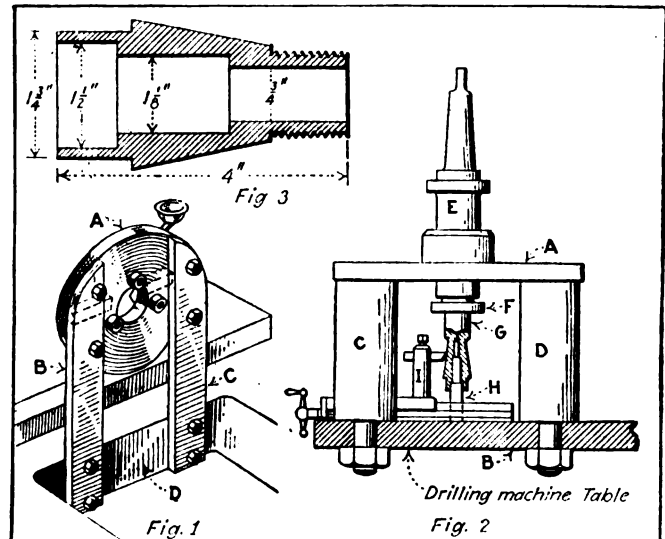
ROLLER REST FOR TURNING PUMP RODS. FIG. 2—TOOL FOR TURNING AND BORING ON DRILL PRESS. FIG. 3—THE PIECE TURNED
